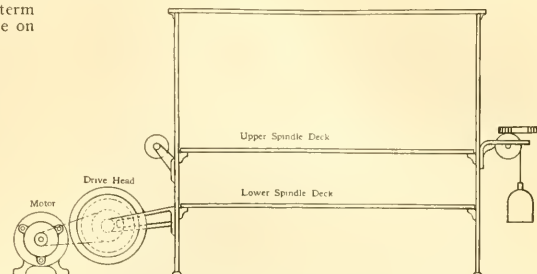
COMBINATION SPINNING, DOUBLING AND TWISTING MACHINE DRIVEN BY A HORIZONTAL MOTOR
